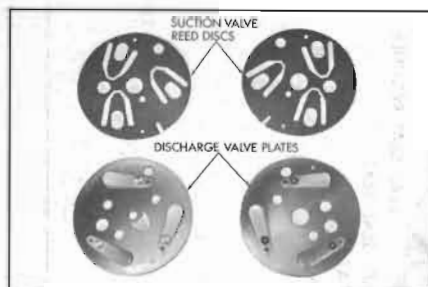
Compressor Suction Valve Reed Discs and Discharge Valve Plates
